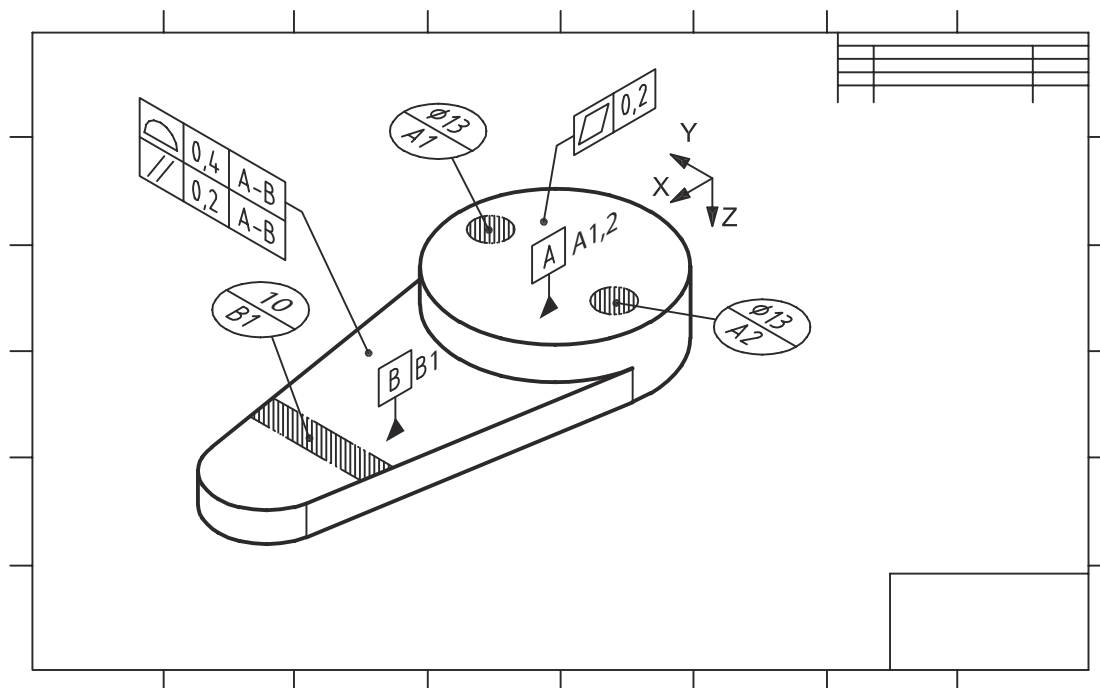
Datum targets and indicators in an axonometric view
